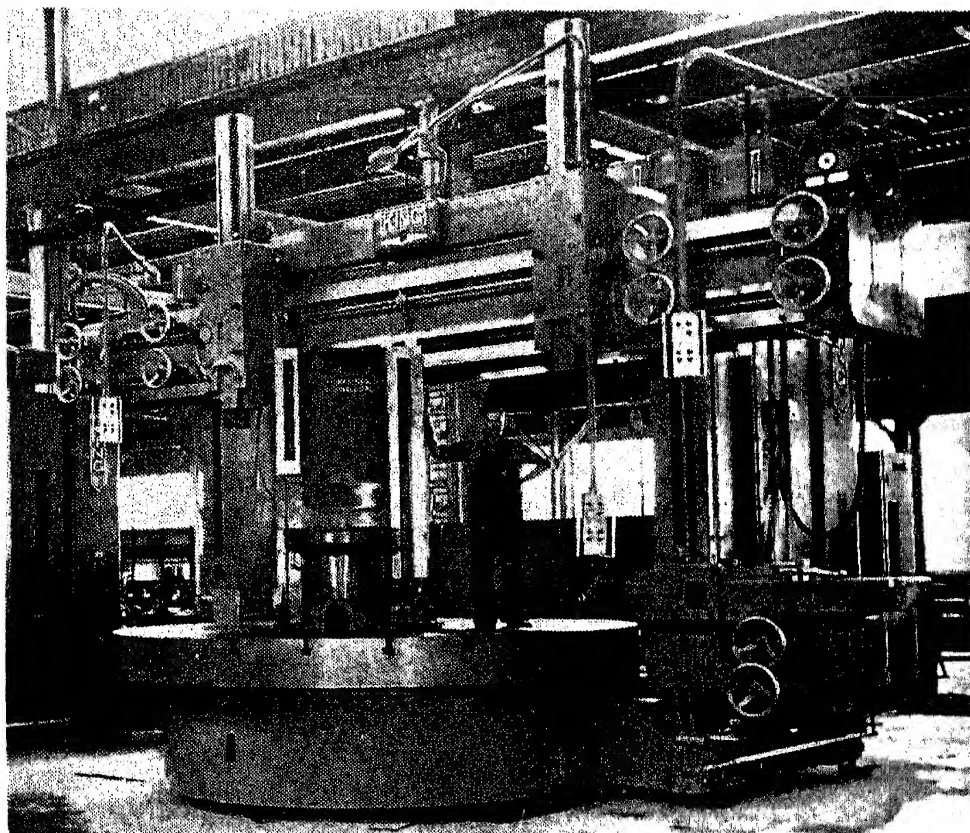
A 144 in. vertical boring mill with the column of a 30 in. vertical turret lathe on its table. (Courtesy King Machine Tool Division, American Steel Foundries.)
